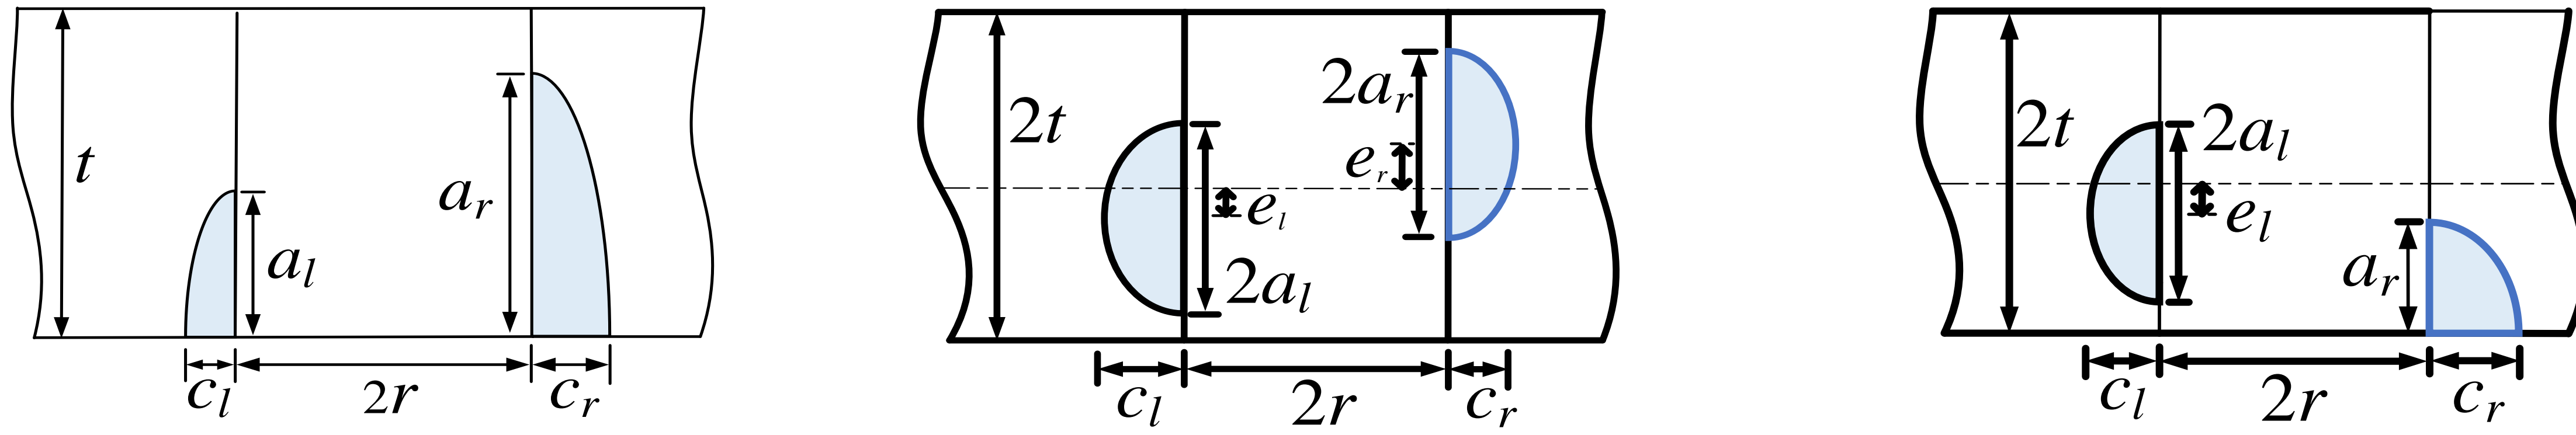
(a) Asymmetric corner cracks; (b) Asymmetric and eccentric surface corner cracks; (c) Combination of surface and corner cracks.
